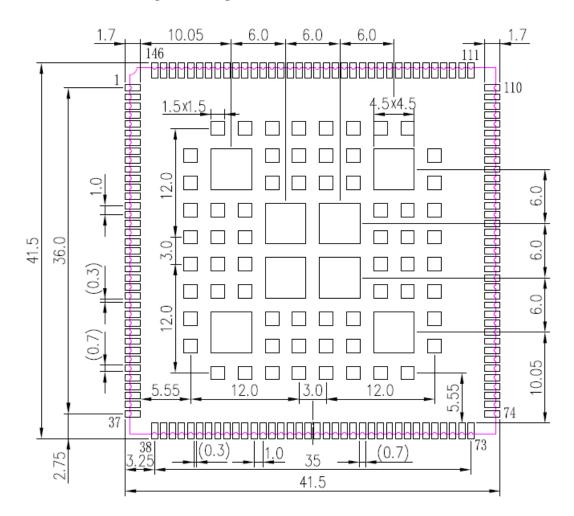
Recommended PCB Welding Plate Design (Unit: mm)
